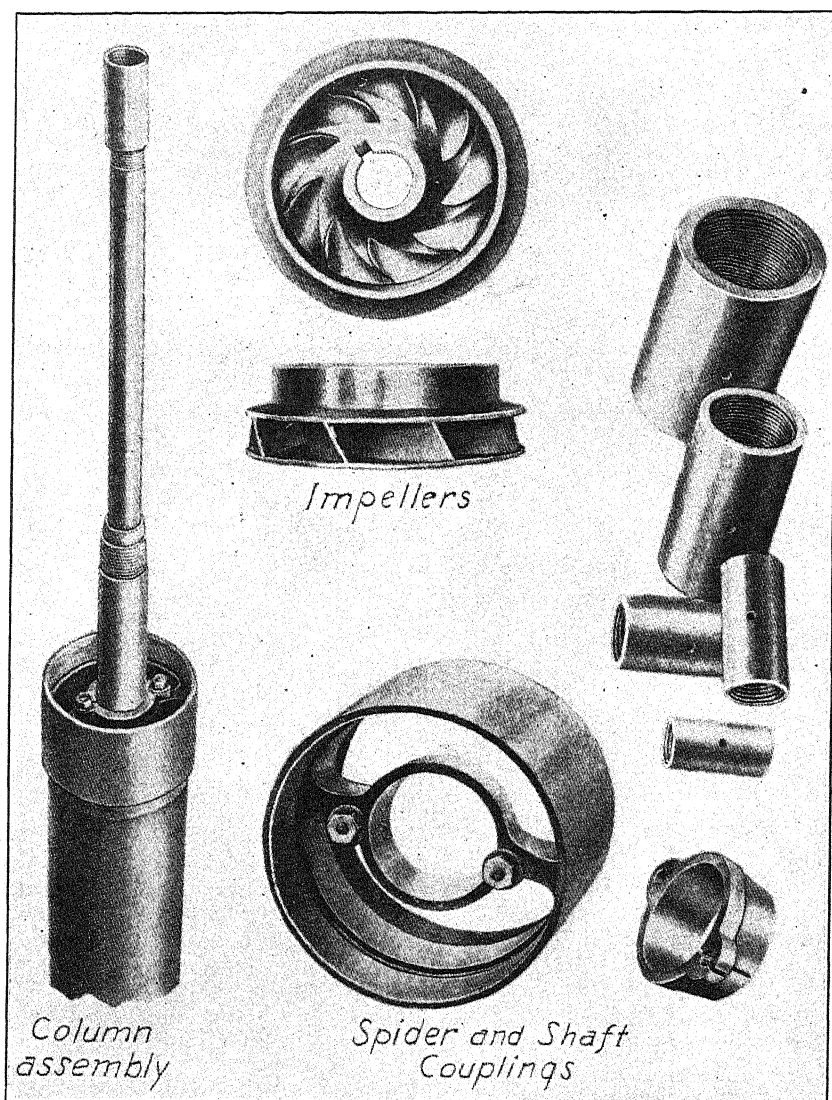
Assembly and parts of a deep-well turbine pump. (Courtesy: Byron Jackson Company.)
